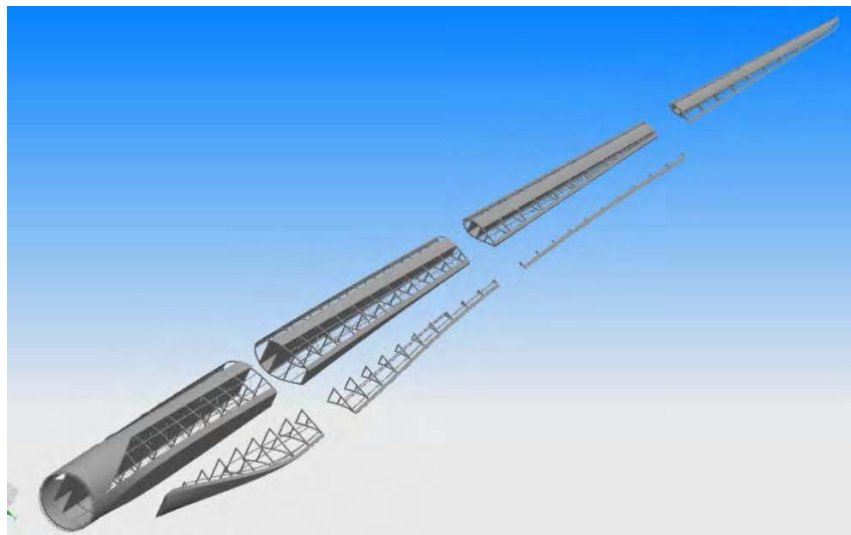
Sectional wind turbine rotor blade as proposed by Wetzel Engineering
